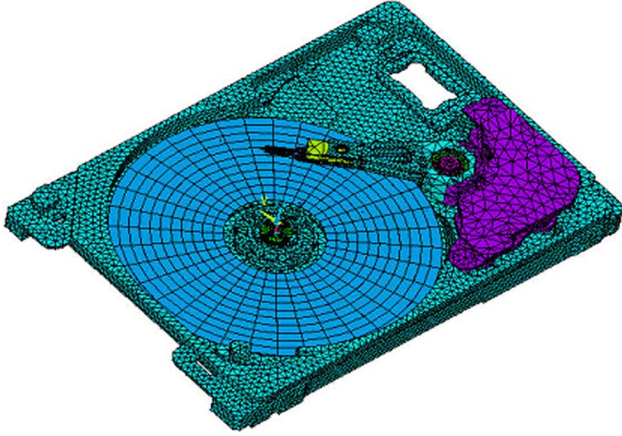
Finite-element model of a 2.5-in HDD composed of the spinning disk-spindle, the head-suspension-actuator, and the base plate.
